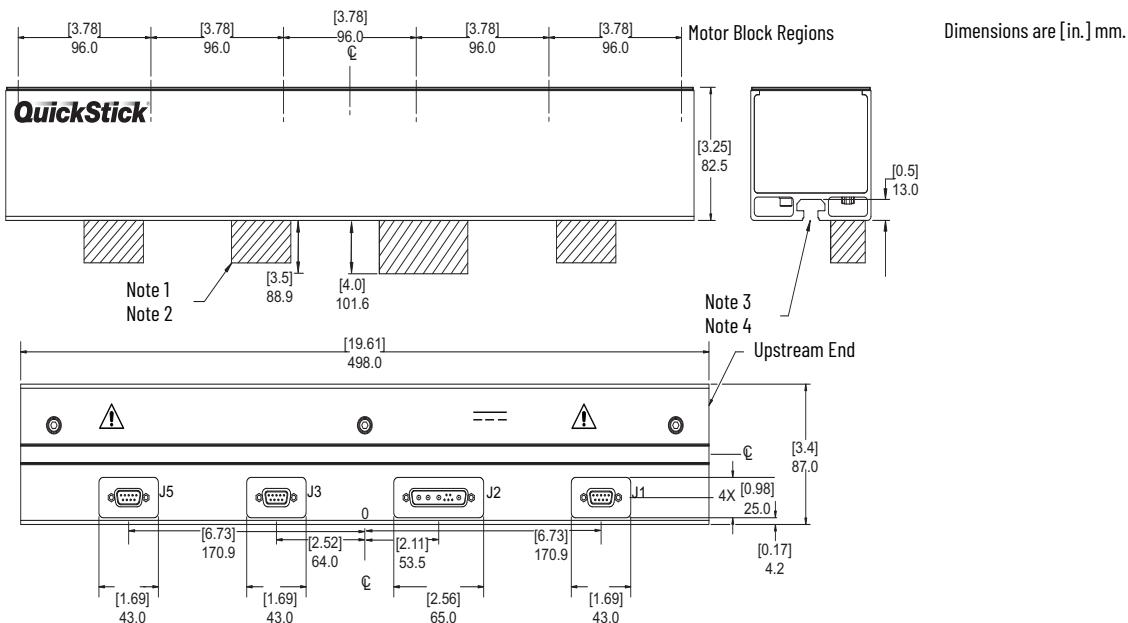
(700-1433-03) Mechanical Drawing 0.5 Meter Motor
